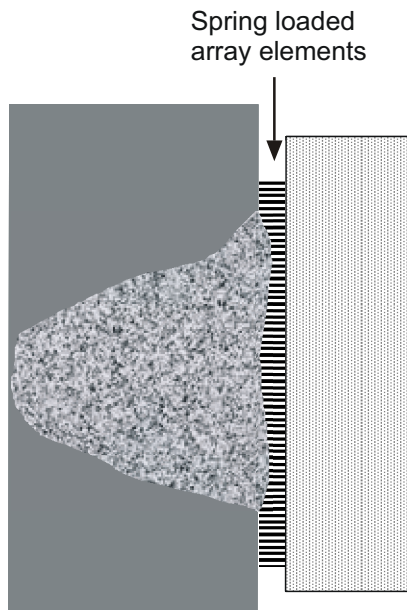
Concept of eddy current inspection array. Each eddy current probe in the array is pressed against the weld surface to maintain consistent contact.
